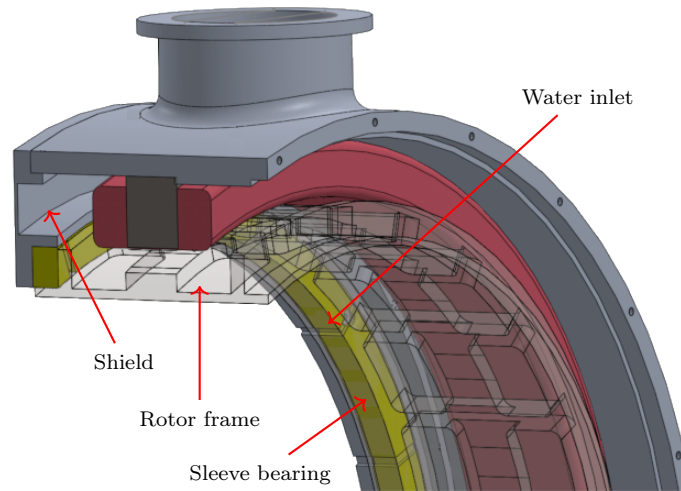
Section of the sleeved machine the sleeve is highlighted in yellow
